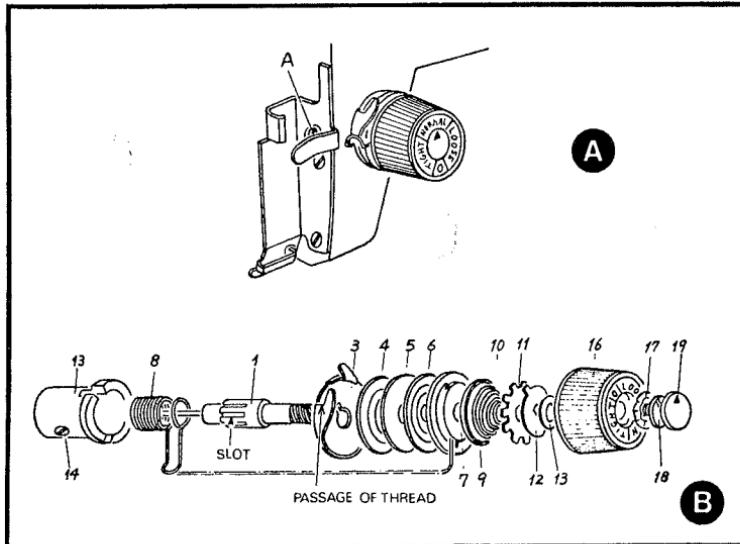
The thread check spring 8 holds a slight tension on the upper thread, up to a certain instant in the sewing cycle to keep the needle on its downstroke from piercing the thread. The tension of the thread check spring 8 can be adjusted, or it can be replaced.
